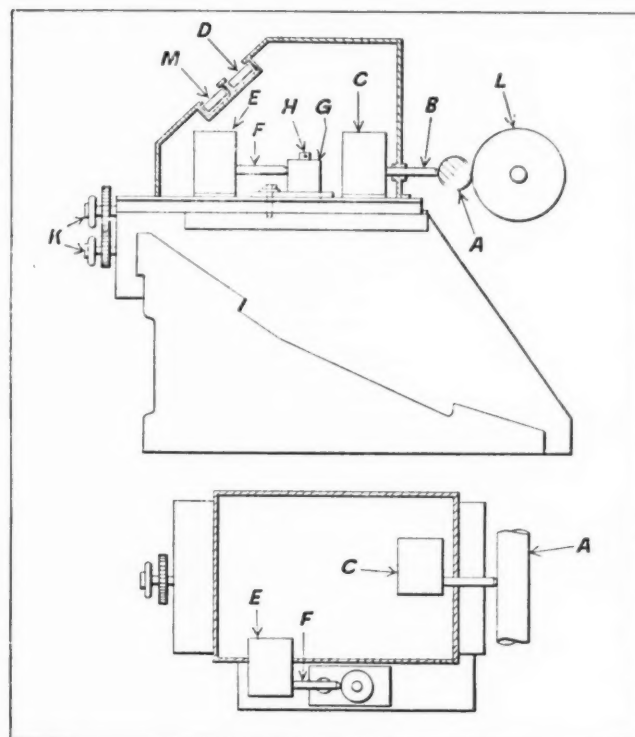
Electromagnetic Gages Used for Grinding Machine Control
